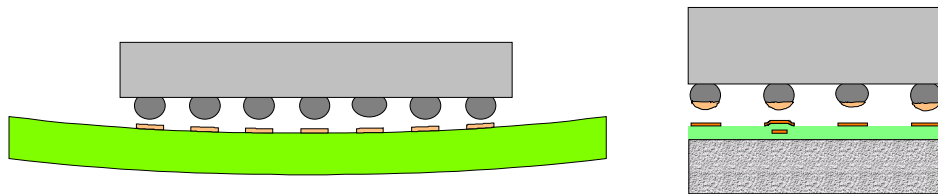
Possible solder failure sources caused by warped substrate or improper design
